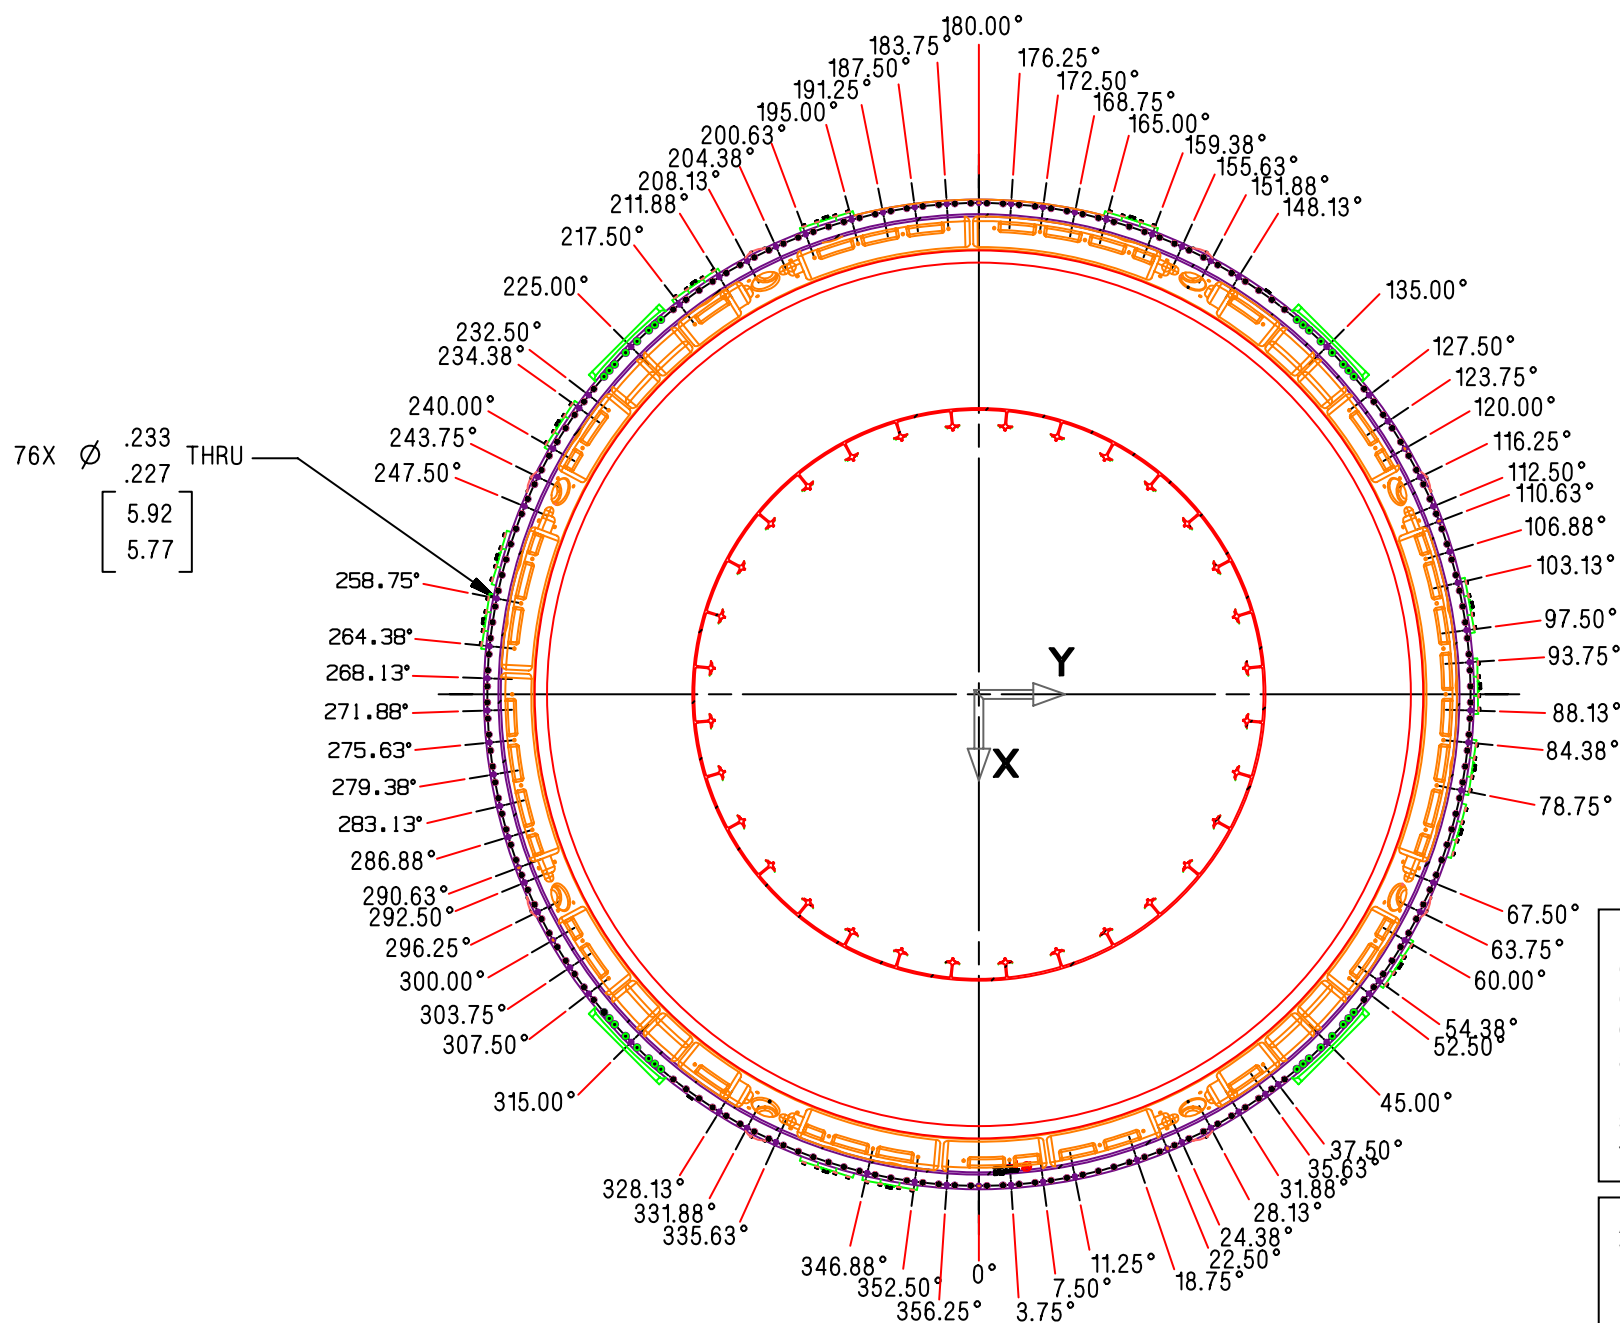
Generic Bolt Hole Pattern on VC Outer Cylinder Lower Flange
